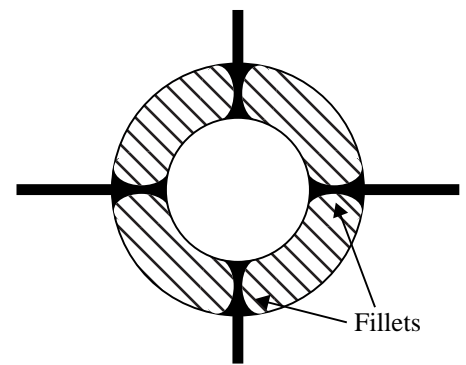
Rear View of Terrier Showing Internal Fillet Detail
